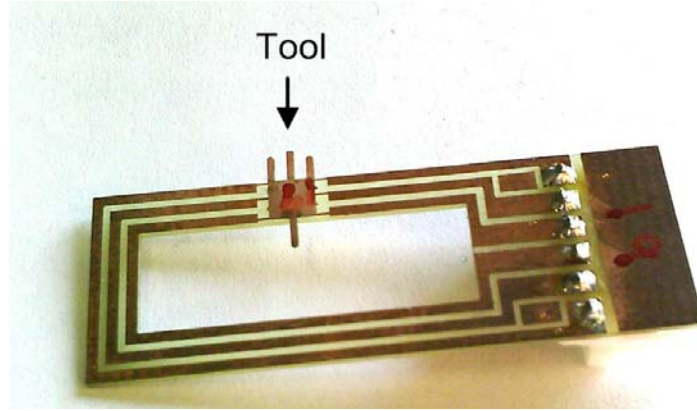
a) Picture of the PCB with the electrical connector pins
